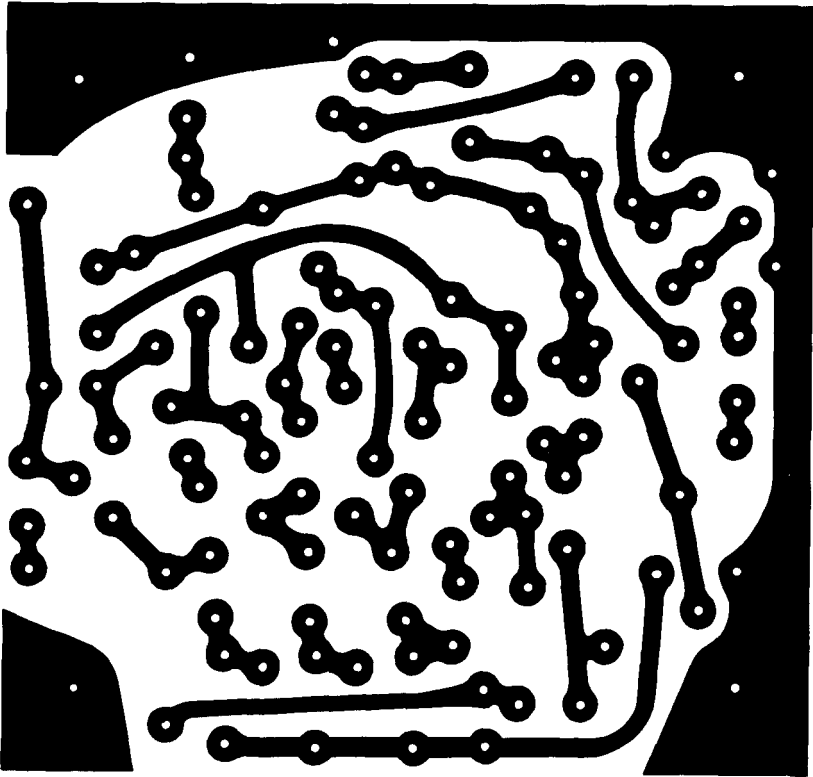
Printed-circuit layout for the improved fm receiver scanner. Component layout is shown in fig. 4.
